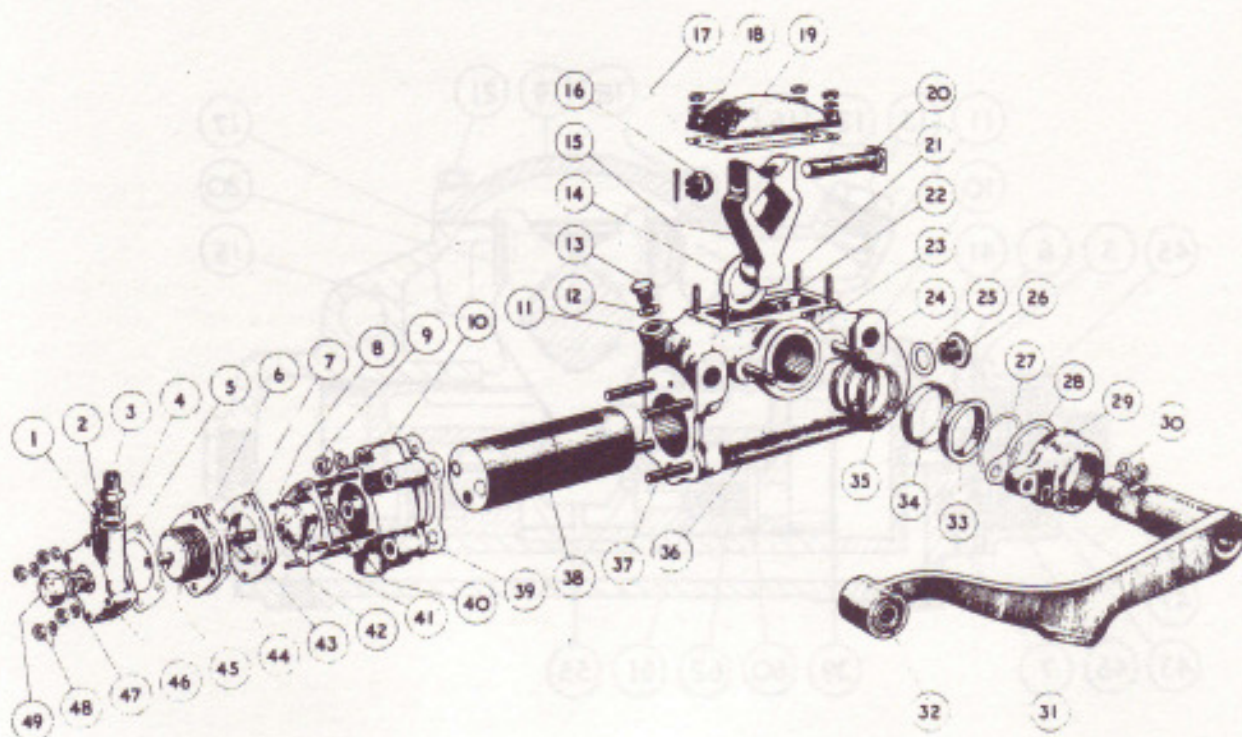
"EXPLODED" VIEW OF REAR SHOCK DAMPER.
